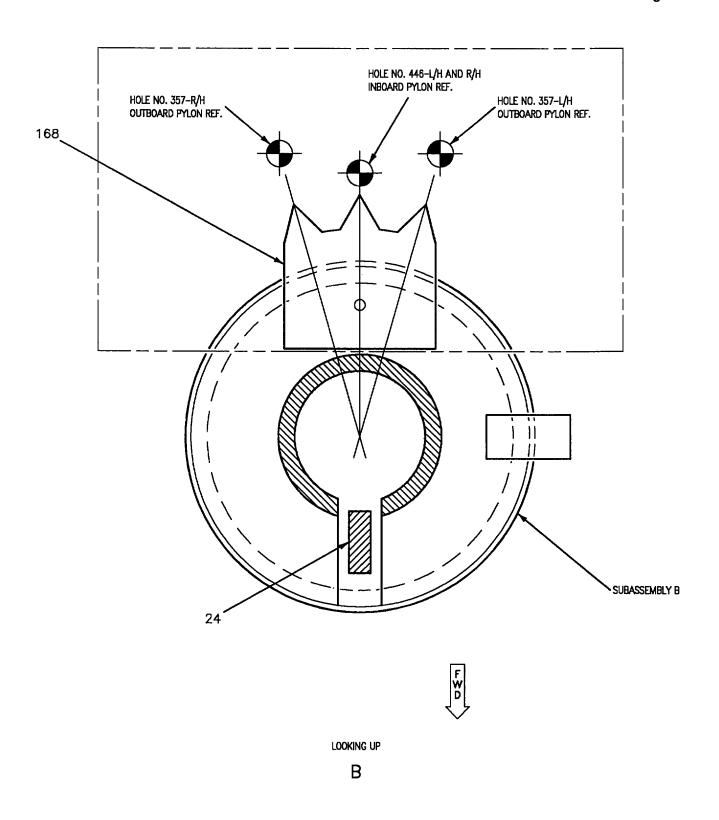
Inspection of Pylon Post Bushings (Sheet 2)
